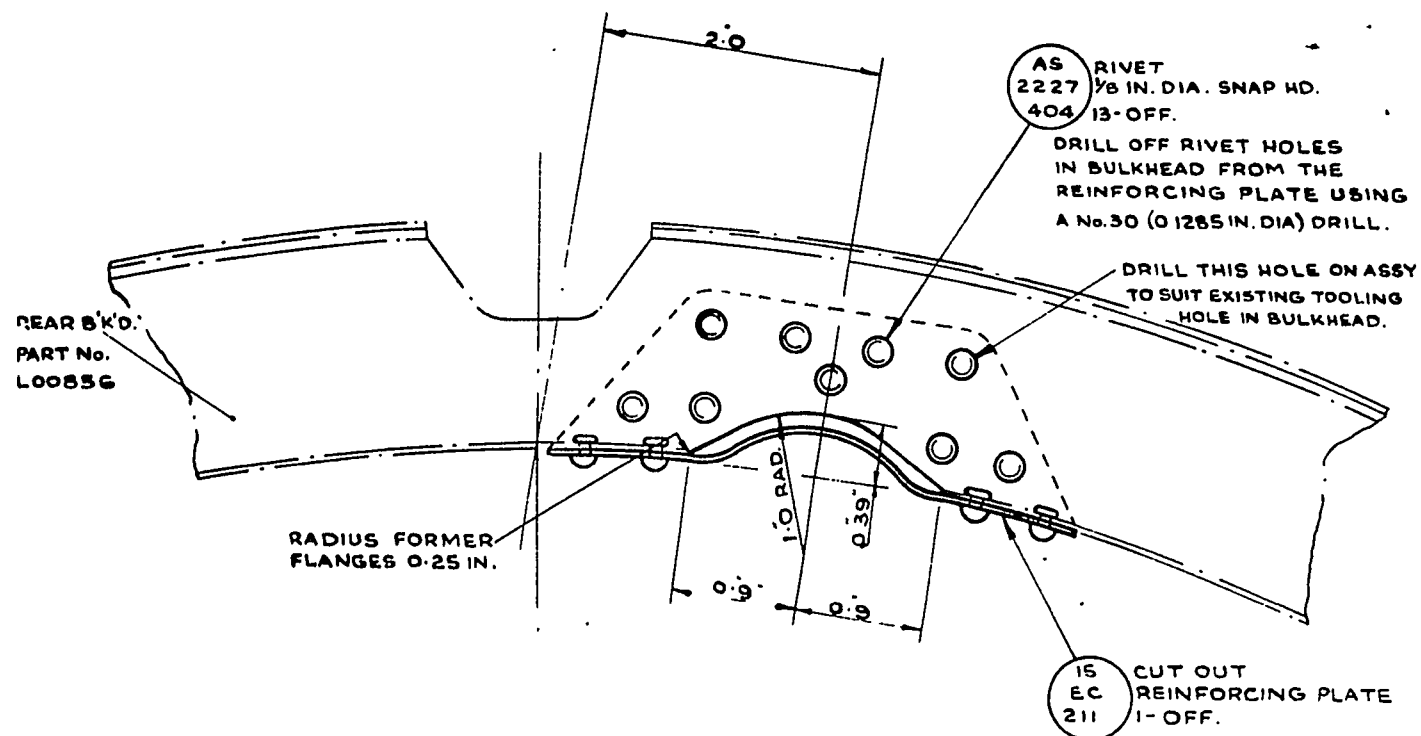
DETAIL 'X' FROM SHEET 1. VIEW LOOKING AFT. SHOWING CUT OUT IN CENTRE BULKHEAD OF TAIL CONE AND FITMENT OF REINFORCING PLATE.
